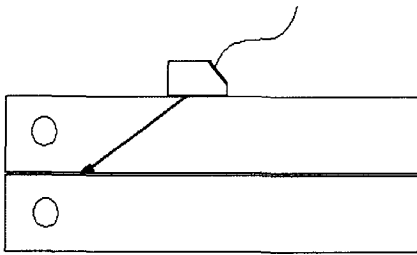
Schematic shape of adhesive bonded DCB test specimen
